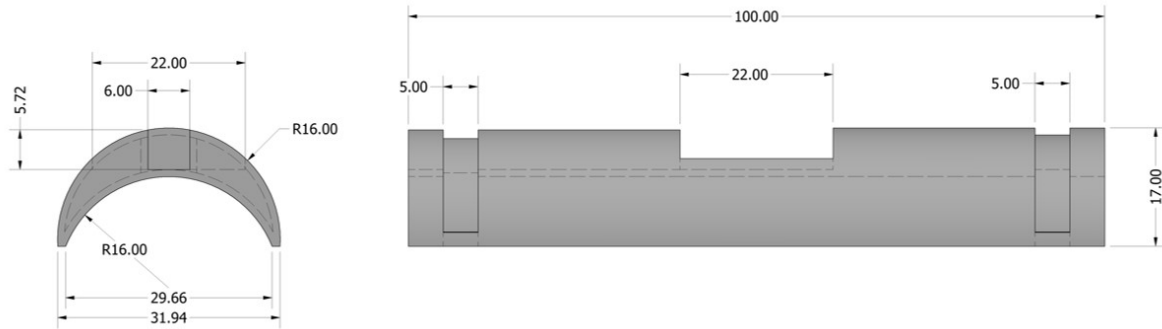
Handle bar grip adaptor accelerometer mount (dimensions in mm).
